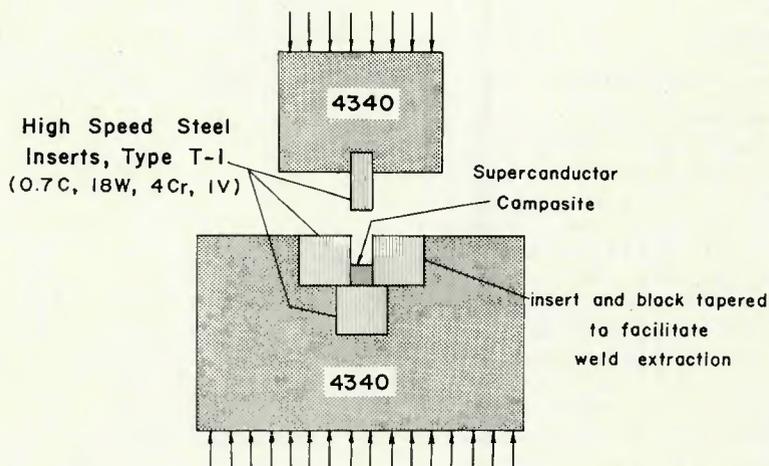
Closed-die tooling which produced satisfactory diffusion welds in superconductor composites (end view)
